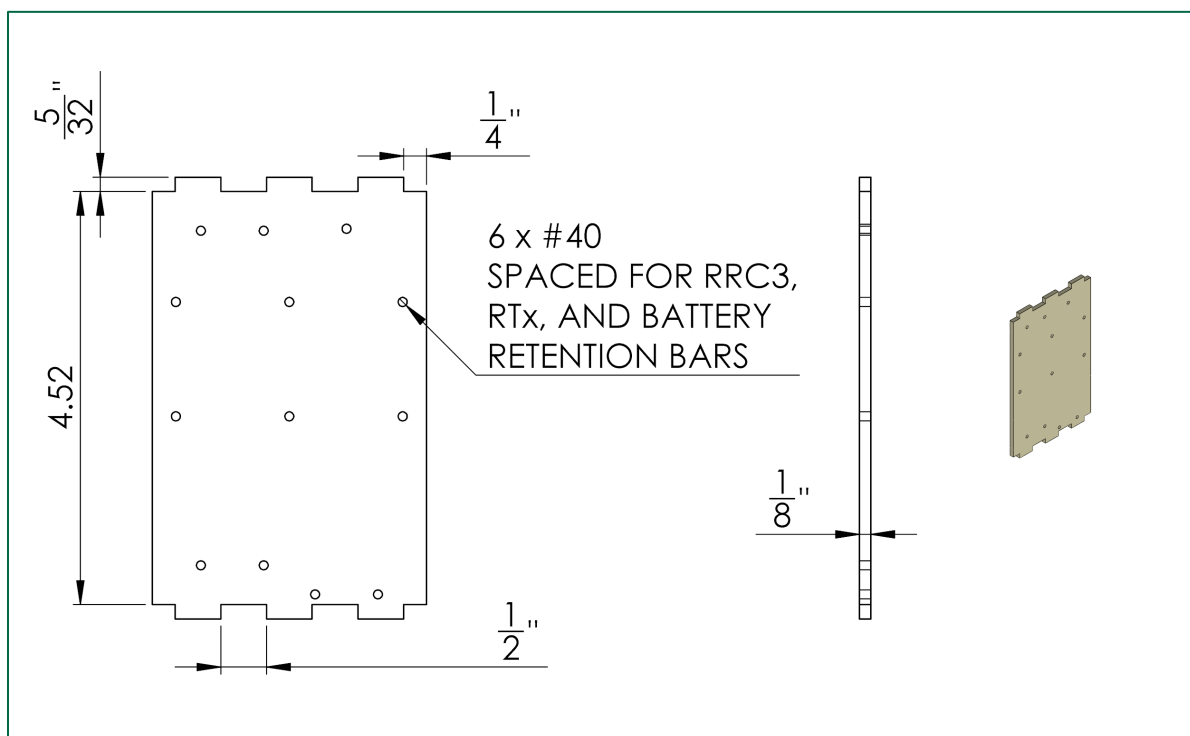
Avionics bay sled assembly side "B", with RRC3 and RTx mounting holes.
